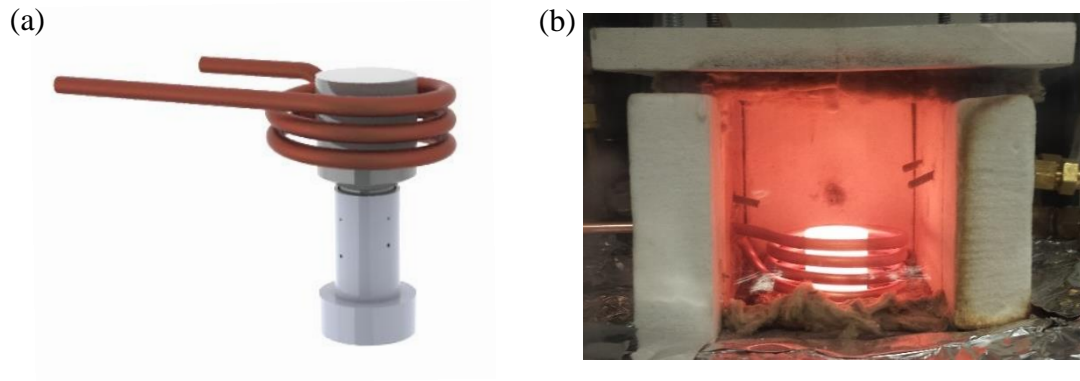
(a) Sketch of the induction heating setup above the outer shell and (b) picture of a heated workpiece inside the Argon-filled enclosure.
